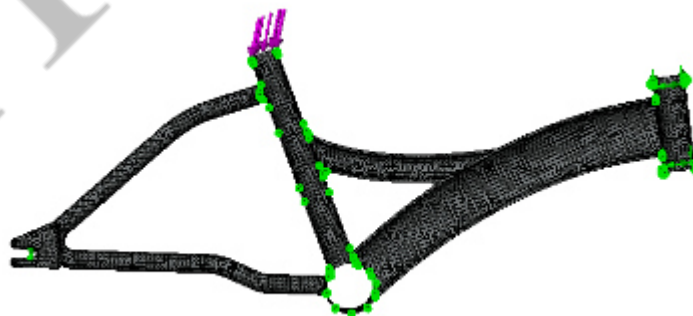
Stitching of frame end pieces (Size 5 mm)
